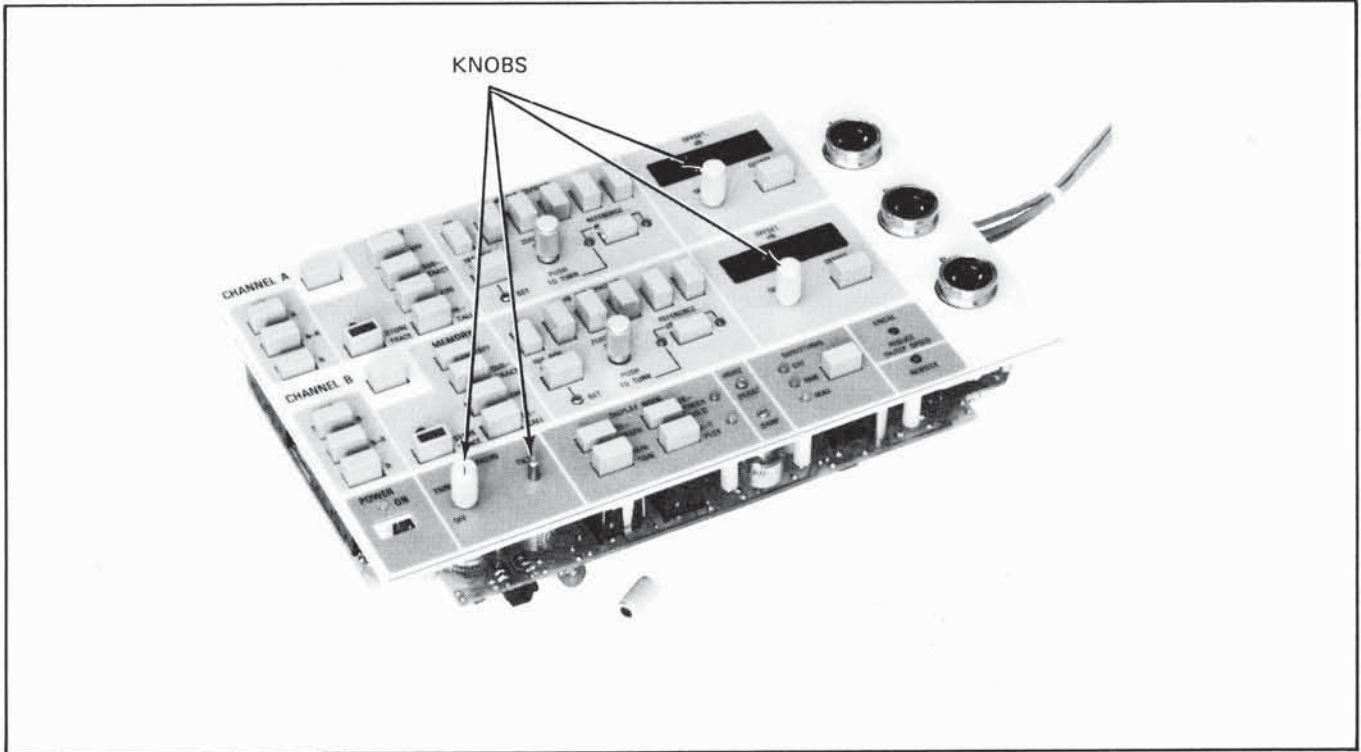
Front Panel Assembly With Knobs That Require Removal Indexed
